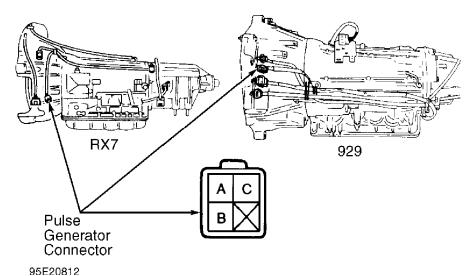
Checking Pulse Generator Courtesy of Mazda Motors Corp.
